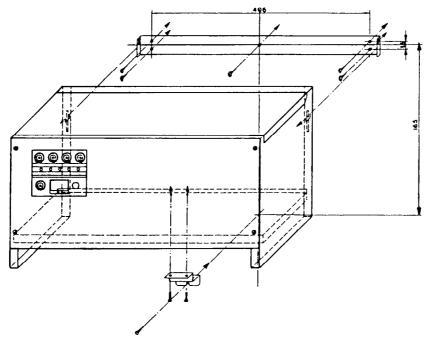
(a) - MAIN EQUIPMENT CABINET DIMENSIONS
